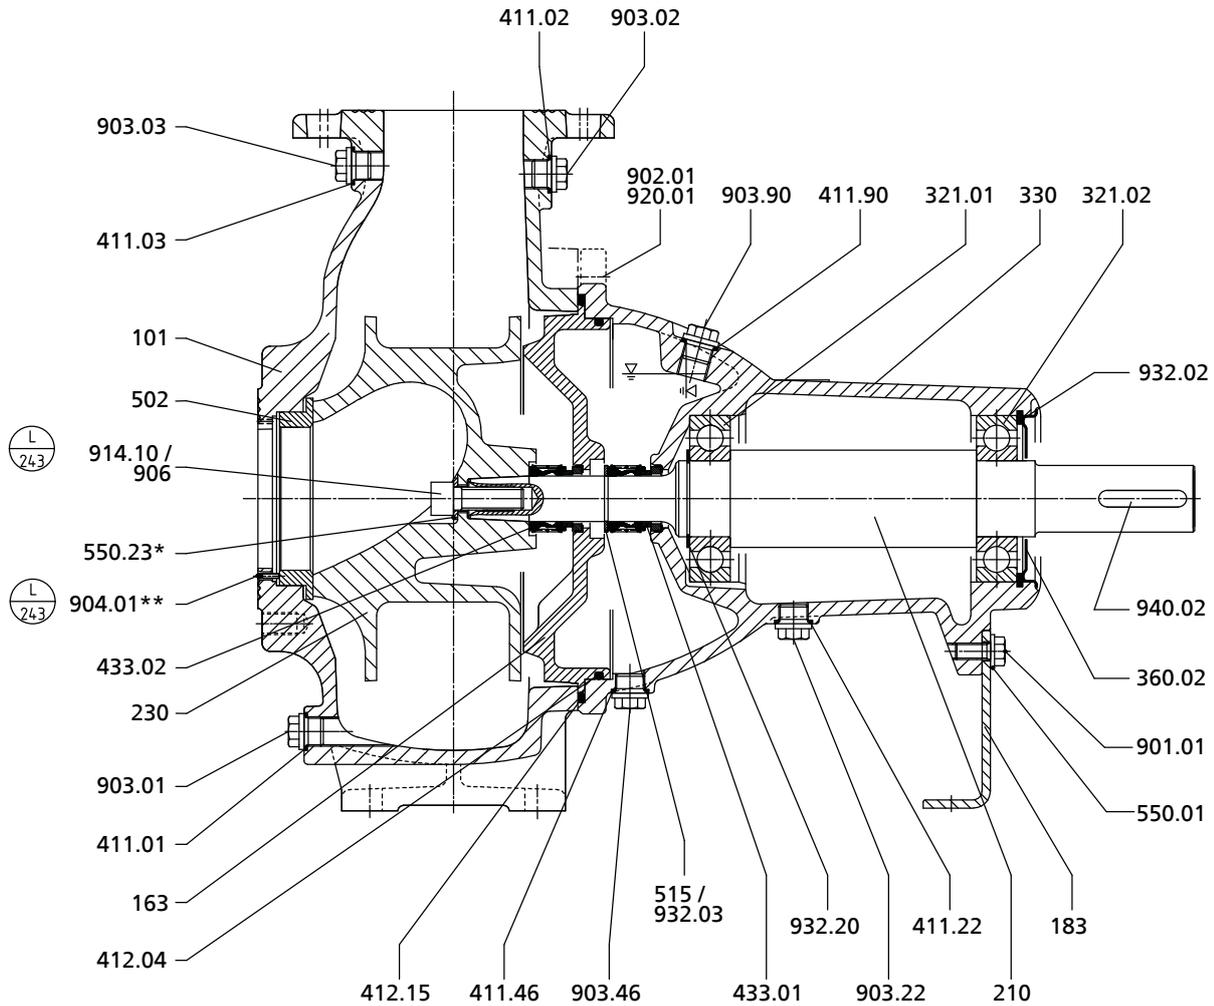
General assembly drawing of Sewatec - with bearing brackets S01, S02, S03, S04, impeller type E; * if any,  only for sizes E 100-250, E 100-253, E 100-317, E 150-317, K 100-253, K 100-254, K 100-316
